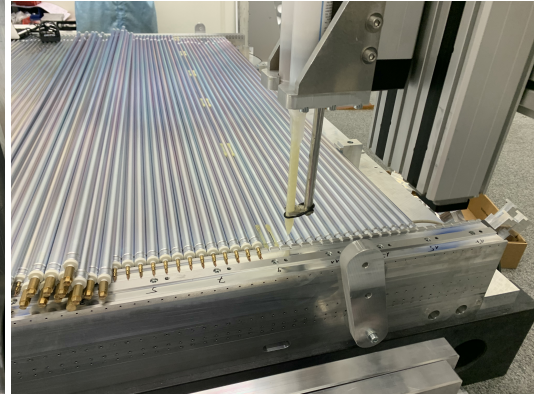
Principle of the sMDT chamber assembly jigging.
